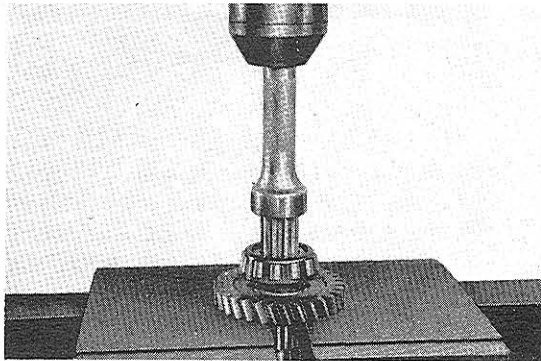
Removing High V0460 Speed Output Gear and Bearing
